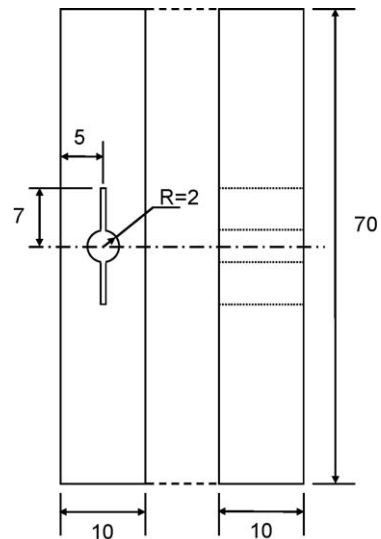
Schematic of the DCDC specimen shape and dimensions in mm.
